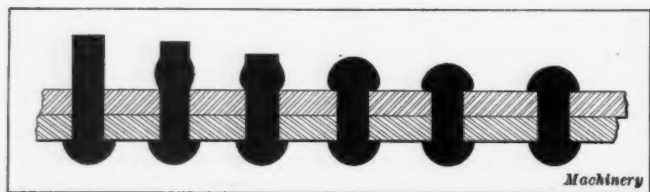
Sequence of Operations in upsetting a Rivet in Electric Welding Machine
